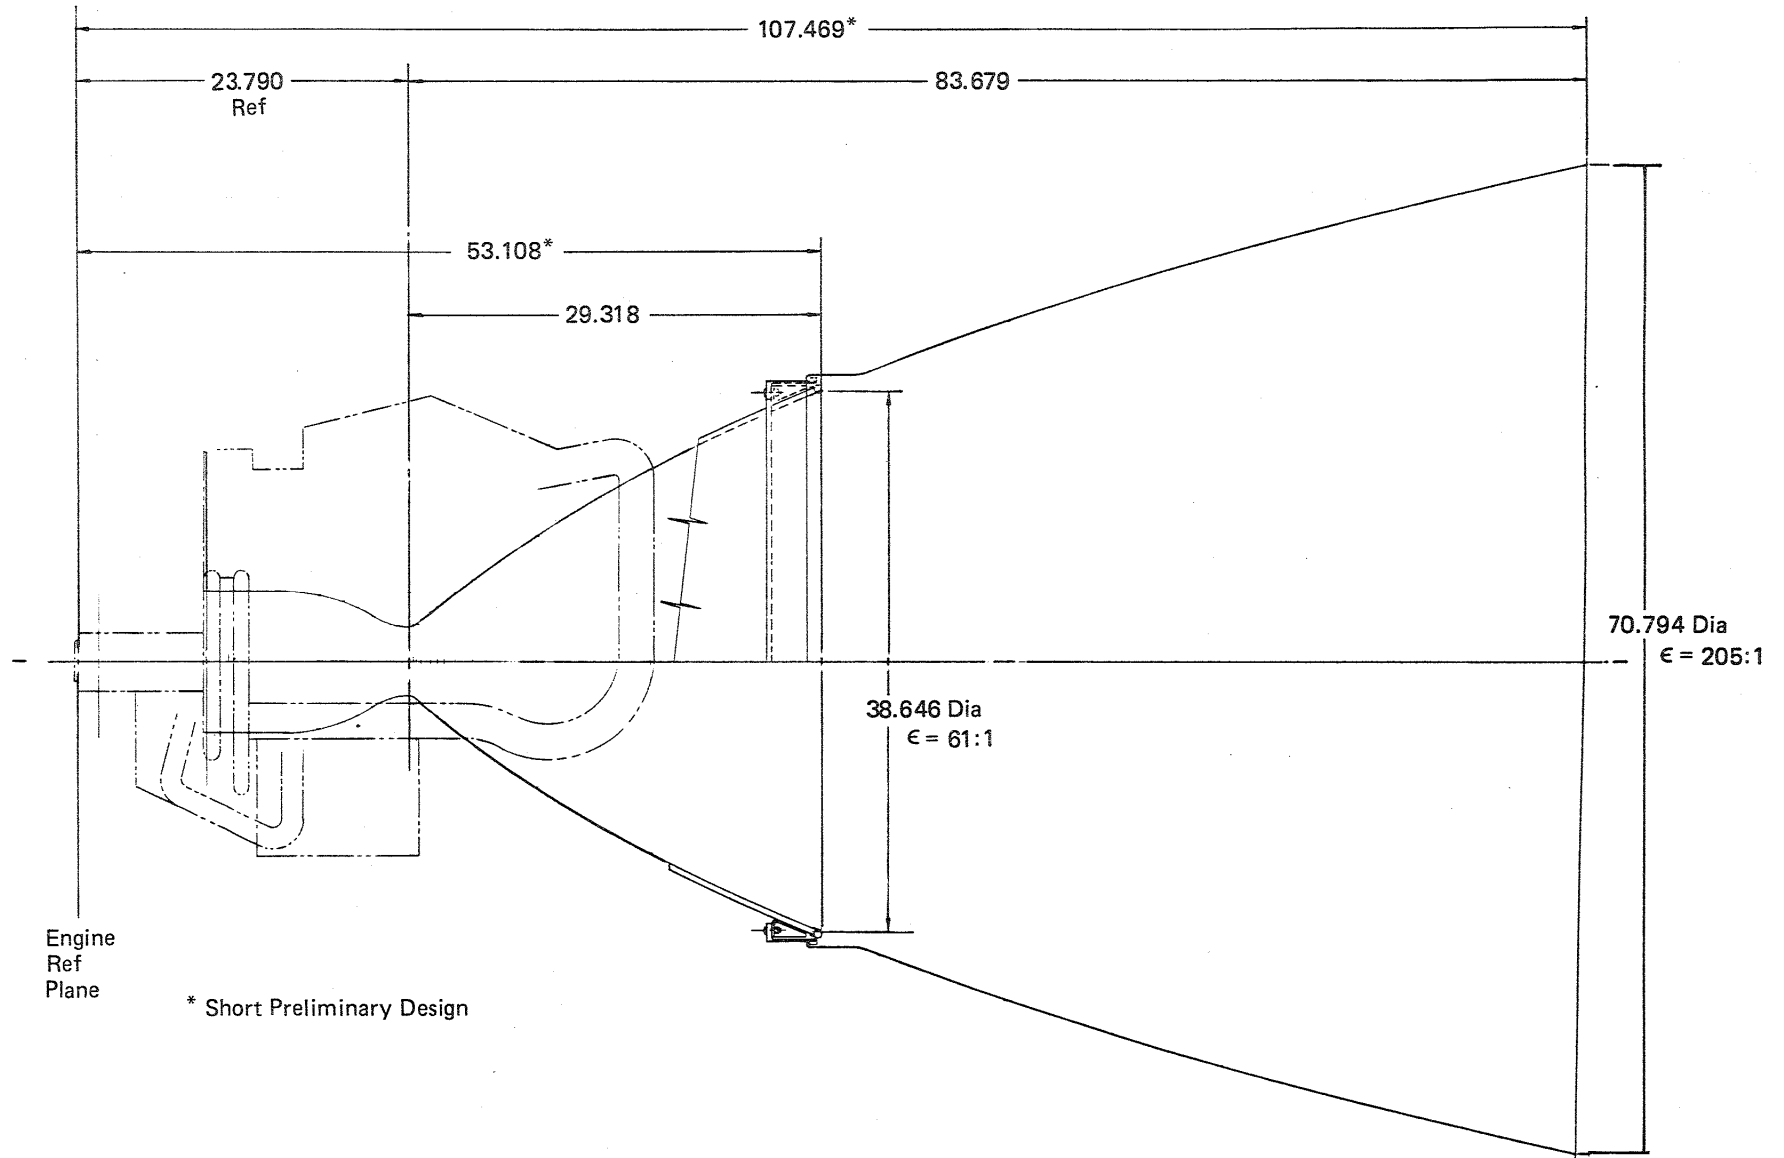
Deployed Convoluted Nozzle Configuration No. 1
